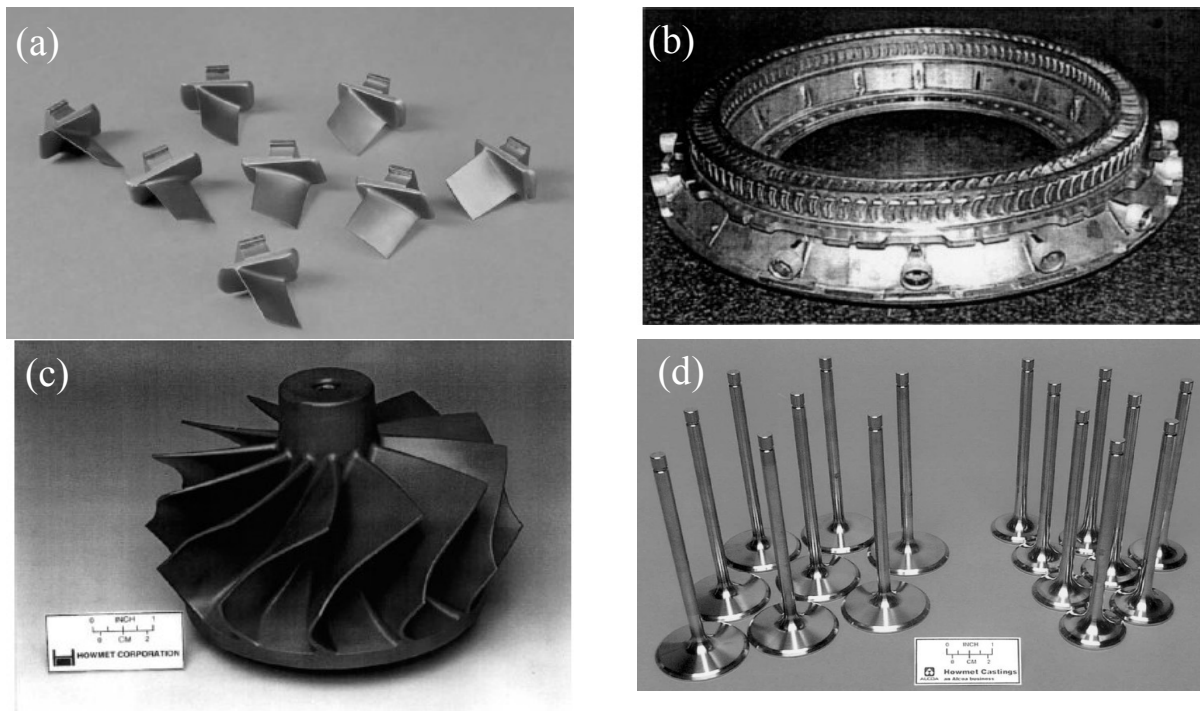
Sample components made out of γ -TiAl (alloys), (a) cast (HP) compressor blades [14], (b) investment cast combustion chamber diffuser [11], (c) turbine wheel of automotive turbocharger [13], (d) Cast γ -TiAl automotive valves [15]
